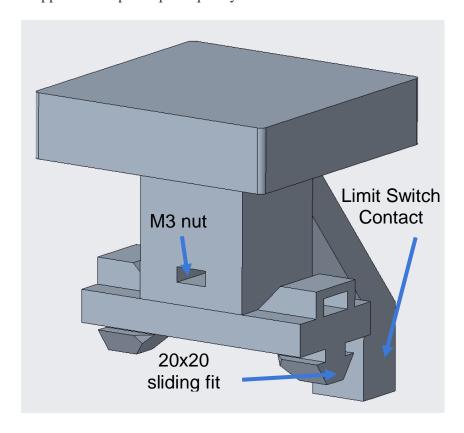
The ball assembly showing the sliding fit portion that locks the ball to the 20x20, the GT2 belt attachment points, the M3 nut slot, and the limit switch contact.
